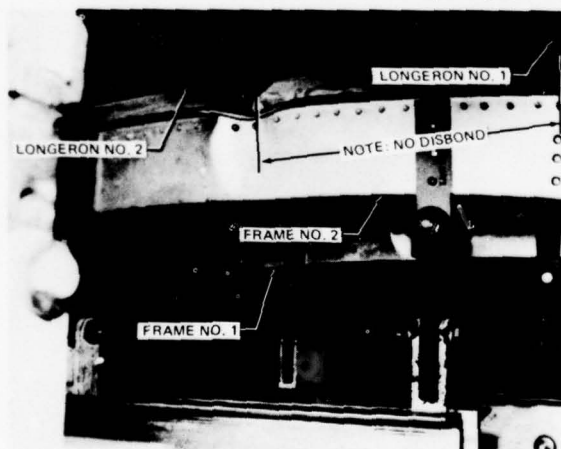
FRAME BENDING TEST, FRAME BUCKLE
